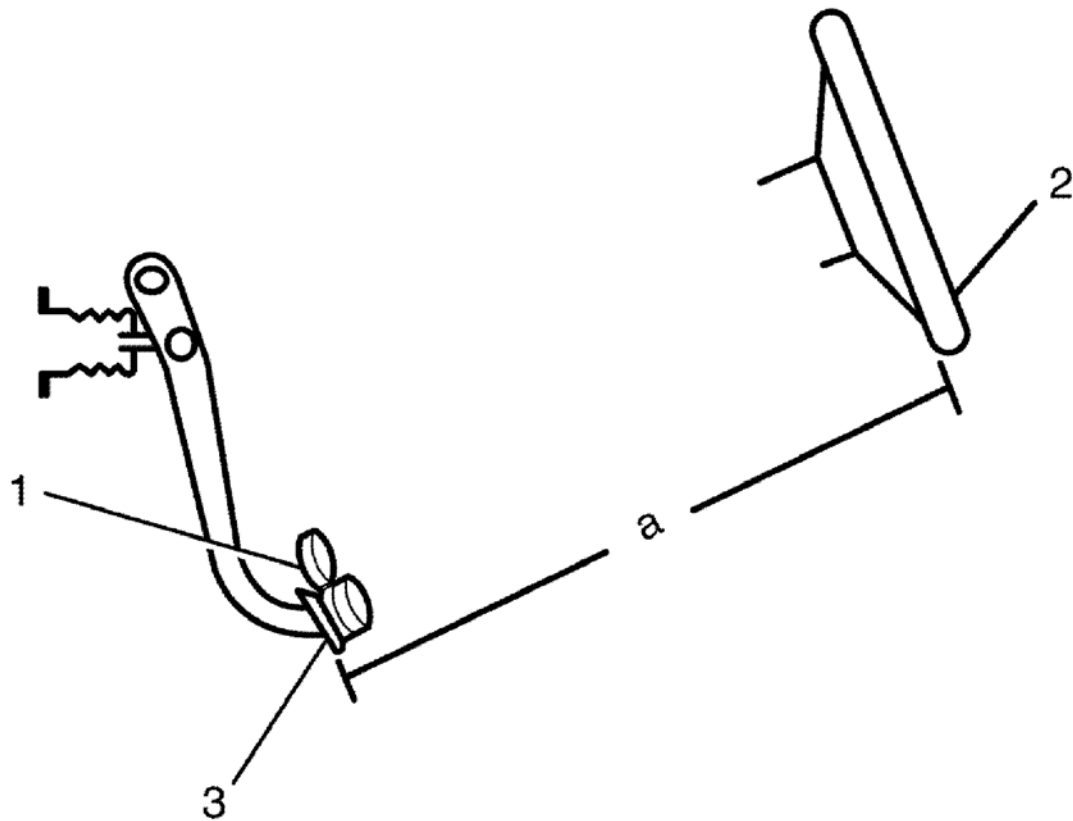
Steering Wheel, Brake Pedal And Gauge
